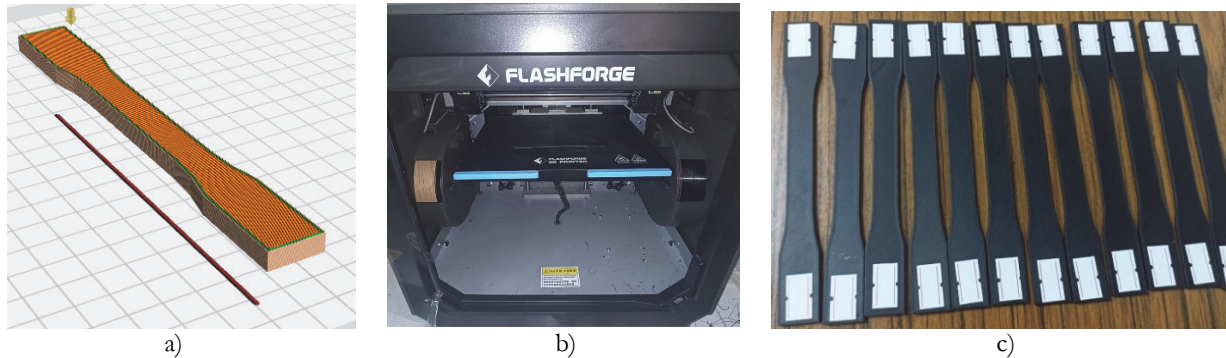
a) Arrangement of model specimen under Flashprint software; b) 3D printing machine; c) A series of 3D-printed specimens.
